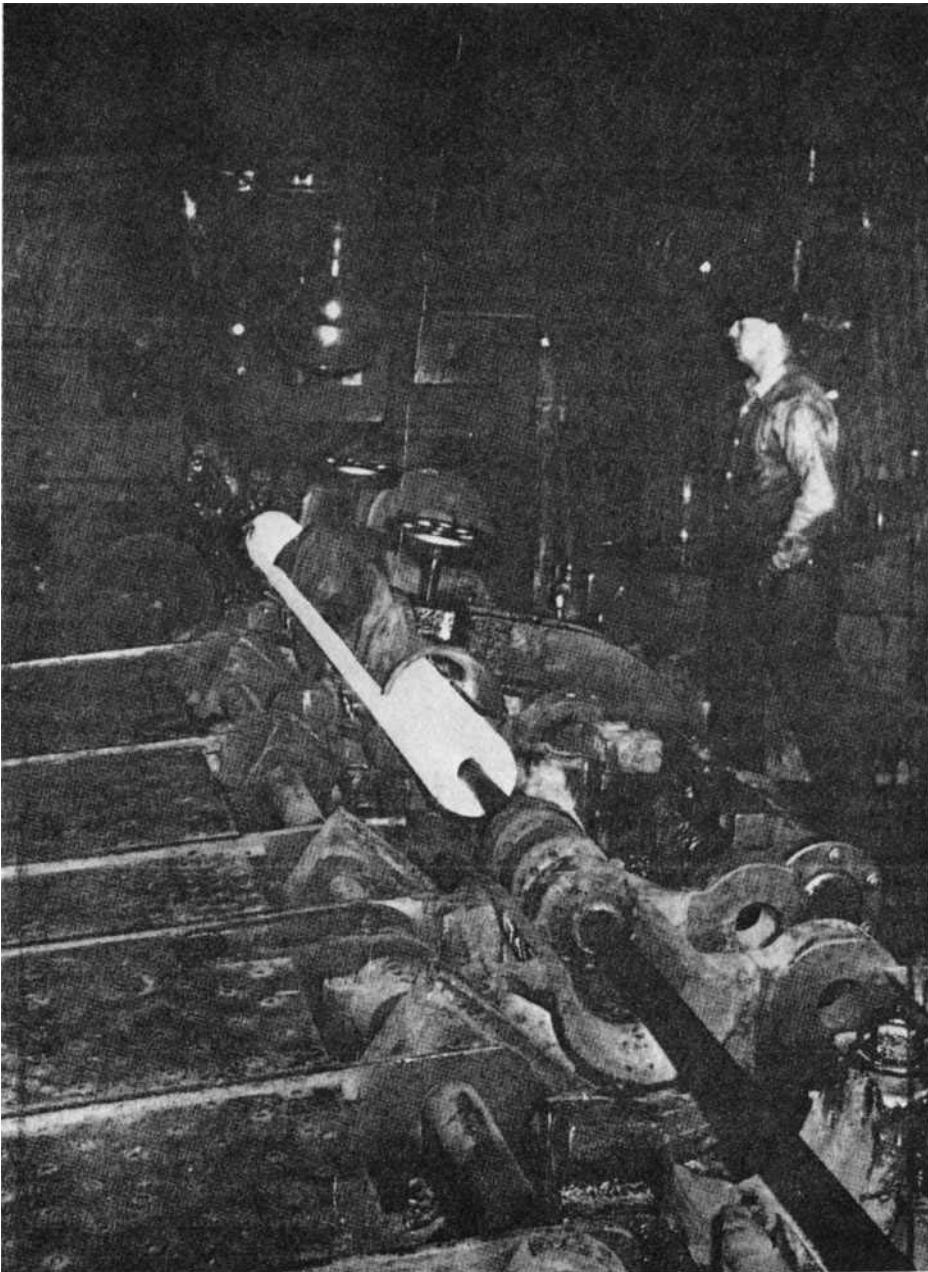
Piercing operation in making heavy gun tubes from seamless tubing (courtesy Timken Roller Bearing Company).
